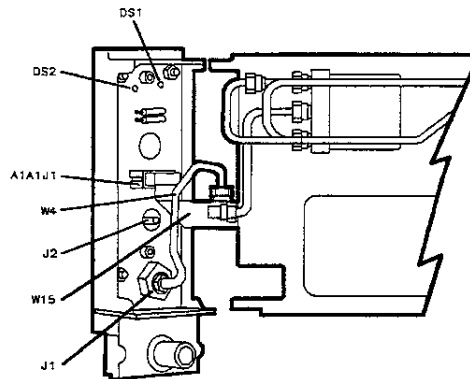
Overall Parts Identification Drawing, Front Panel (1 of 3)
